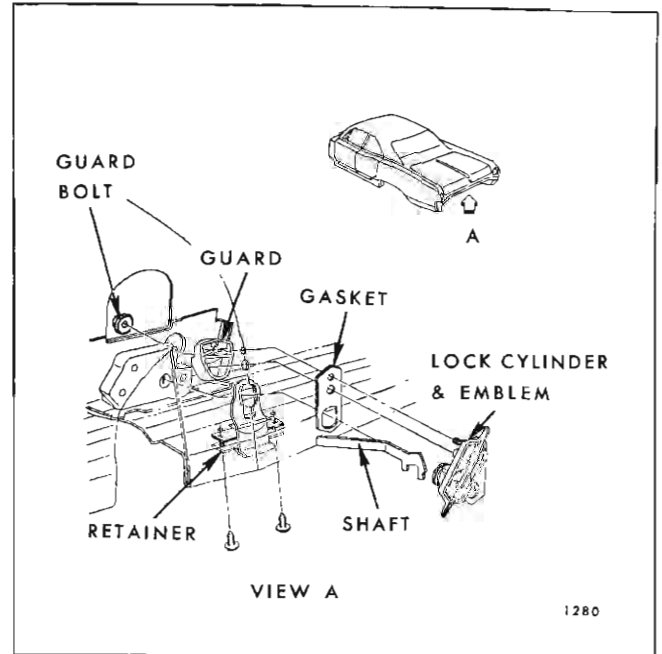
F11—Rear Compartment Lid Lock Cylinder and Emblem Assembly
